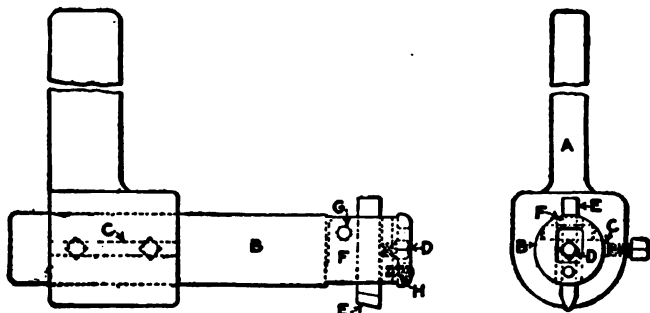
ADJUSTABLE EXTENSION PLANING TOOL
